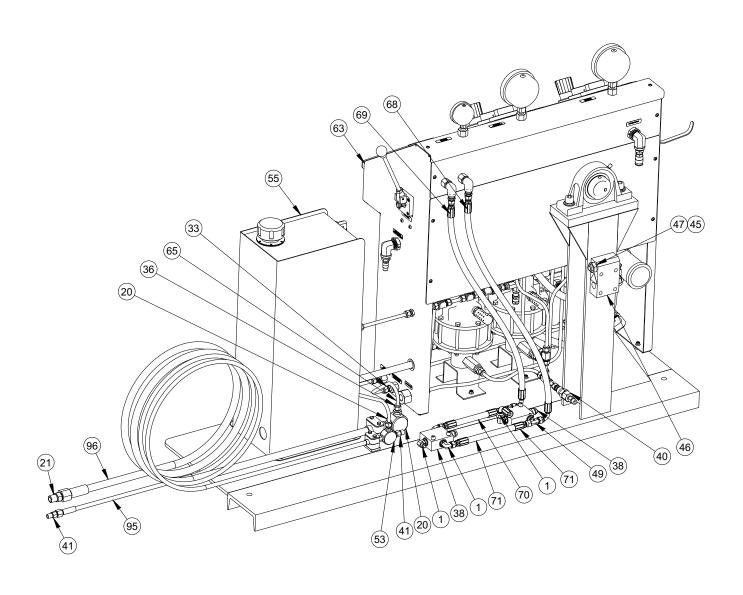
UFV-14-165T CONSOLE BACK ASSEMBLY (P/N 88469)
